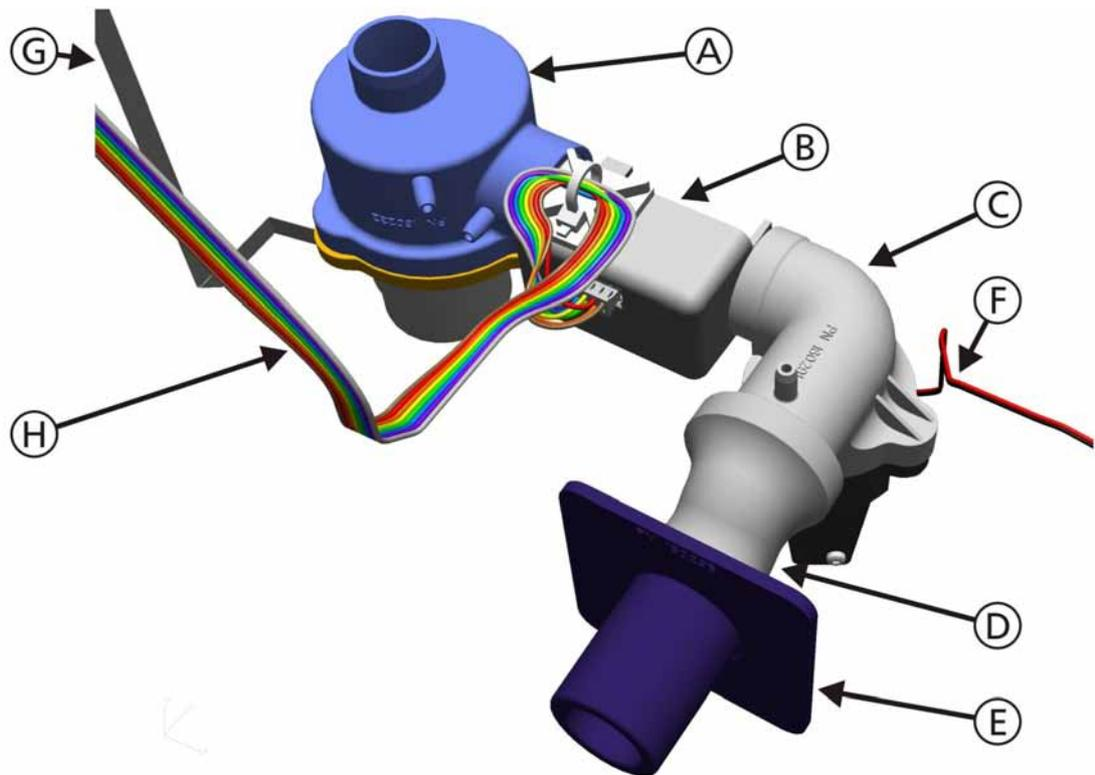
Inspiratory Valve, Qvent Flow Sensor and Ambient Valve Assembly, Step 1
